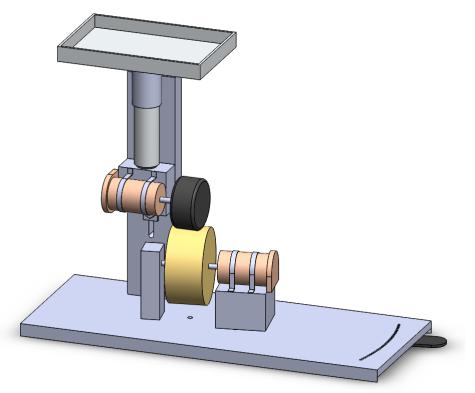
Isometric view, dyno rotated at 10°, contacting
